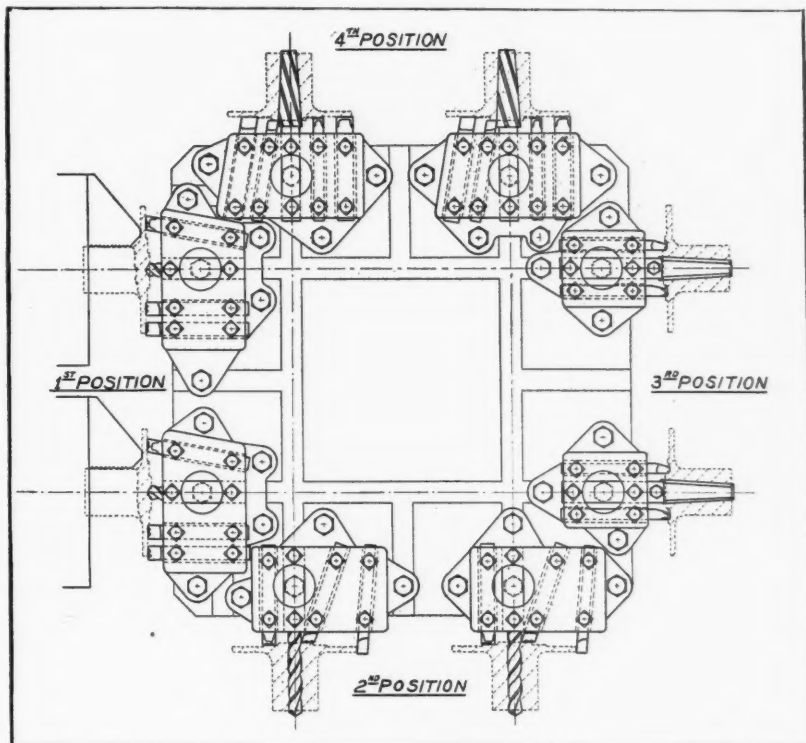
Tooling Equipment used on a Double-spindle Flat Turret Lathe for machining an Automobile Rear Hub
